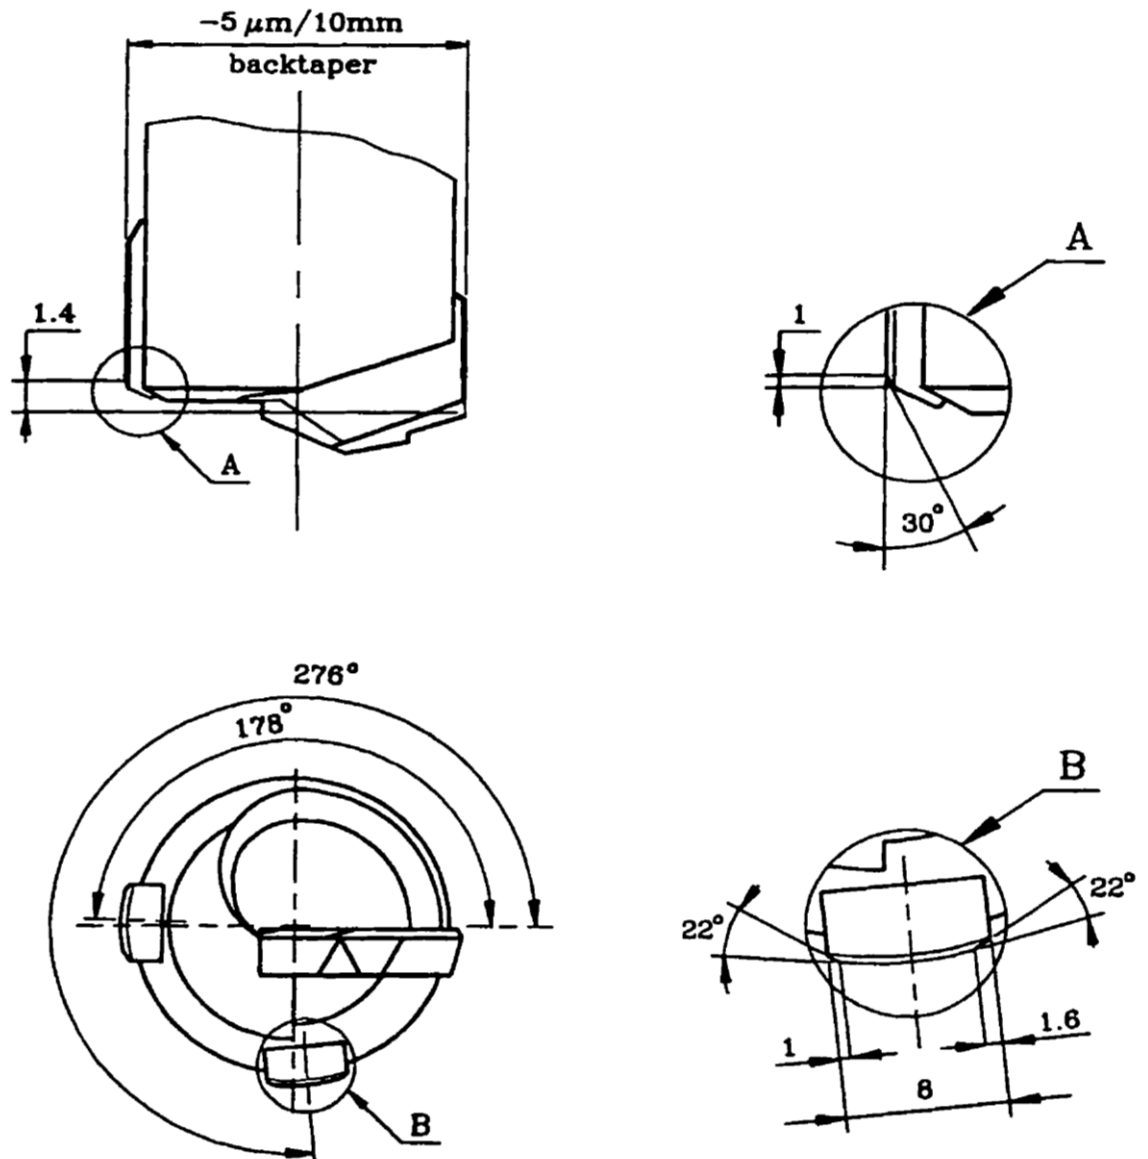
b. BTA-Type Drill of Heller Design (Burnish Geometry)
